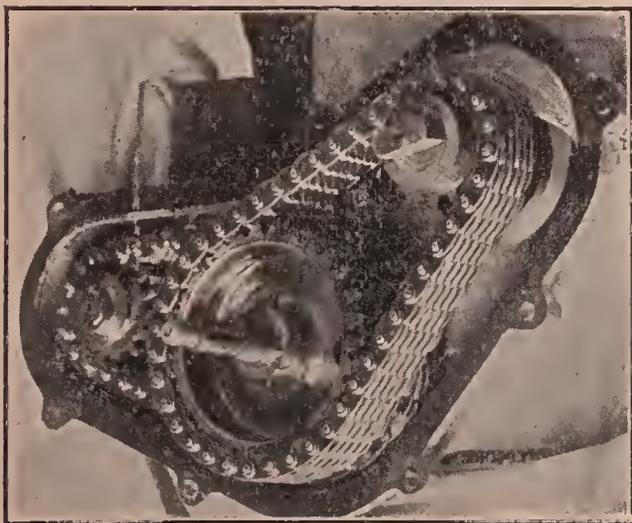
Camshaft and Auxiliary Shaft Drive by Means of Silent Chain, a Method Which Is Growing Rapidly in Favor.
